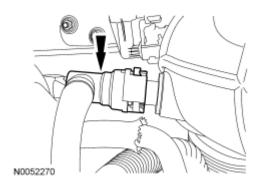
Identifying Engine Front Components Courtesy of FORD MOTOR CO.
